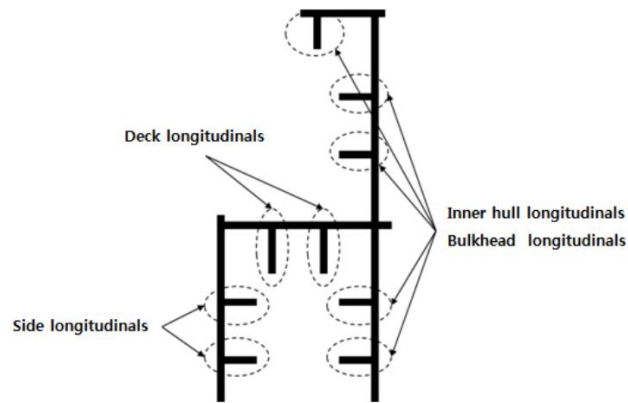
Upper Flange Longitudinal Structural Members
